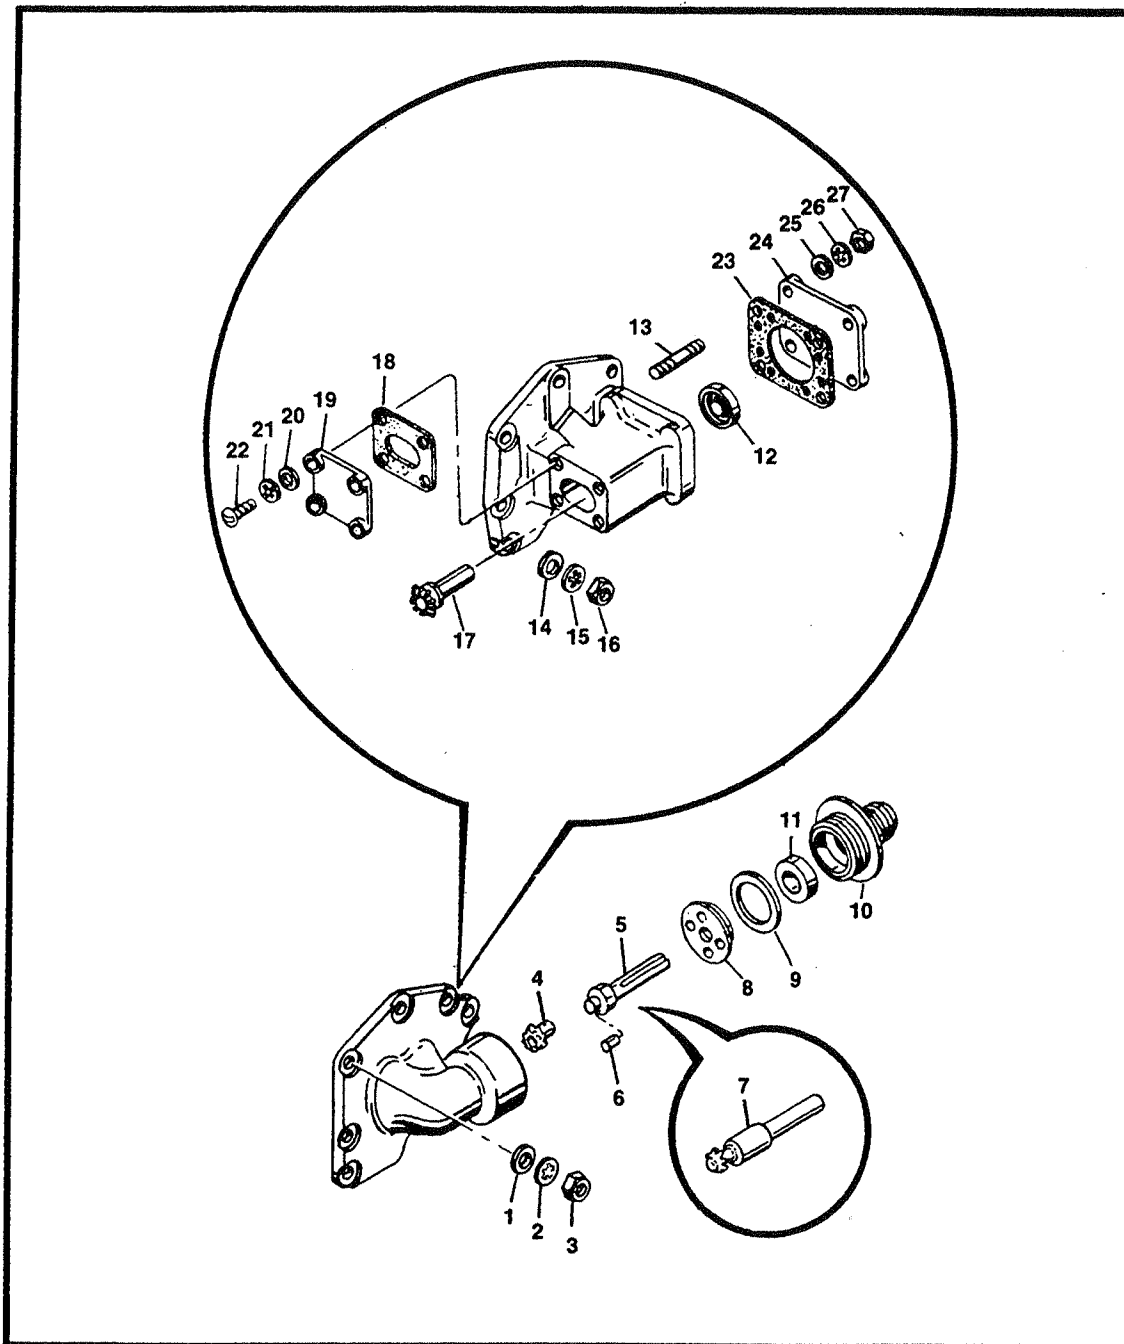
B. OIL PUMP COVER AND TACHOMETER DRIVE.
